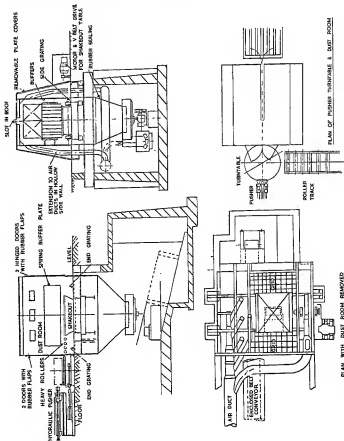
Enclosed knock-out installed by The Clyde Alloy Steel Co., Ltd., (after Shepherd, Reference 27).
